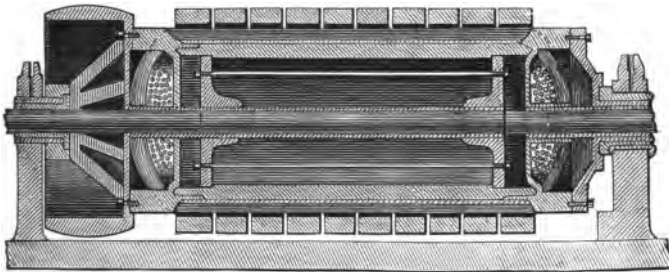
Siemens' Machine with fixed armature core: Section.
